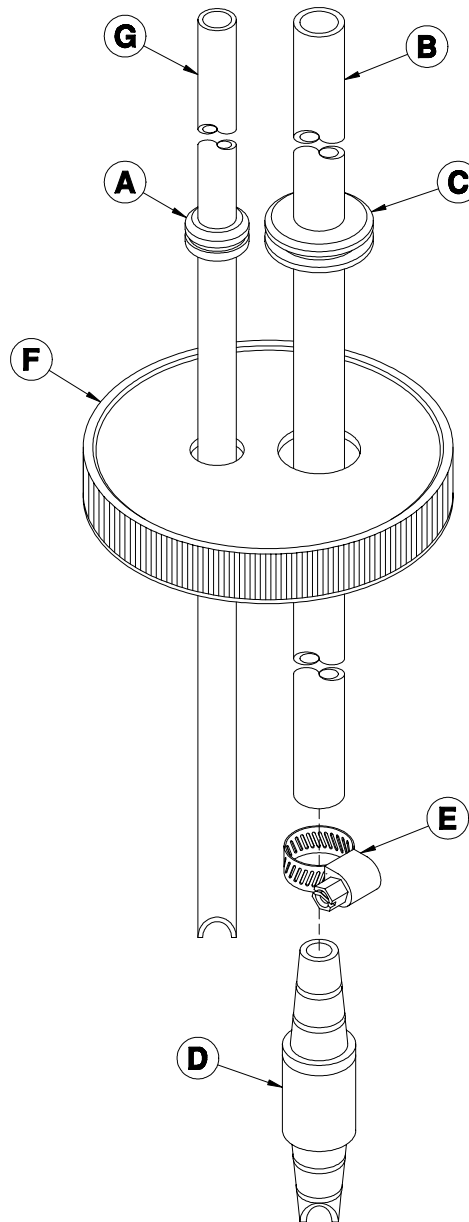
Lube Reservoir Hose Assembly (Part No. 15585), Exploded View
